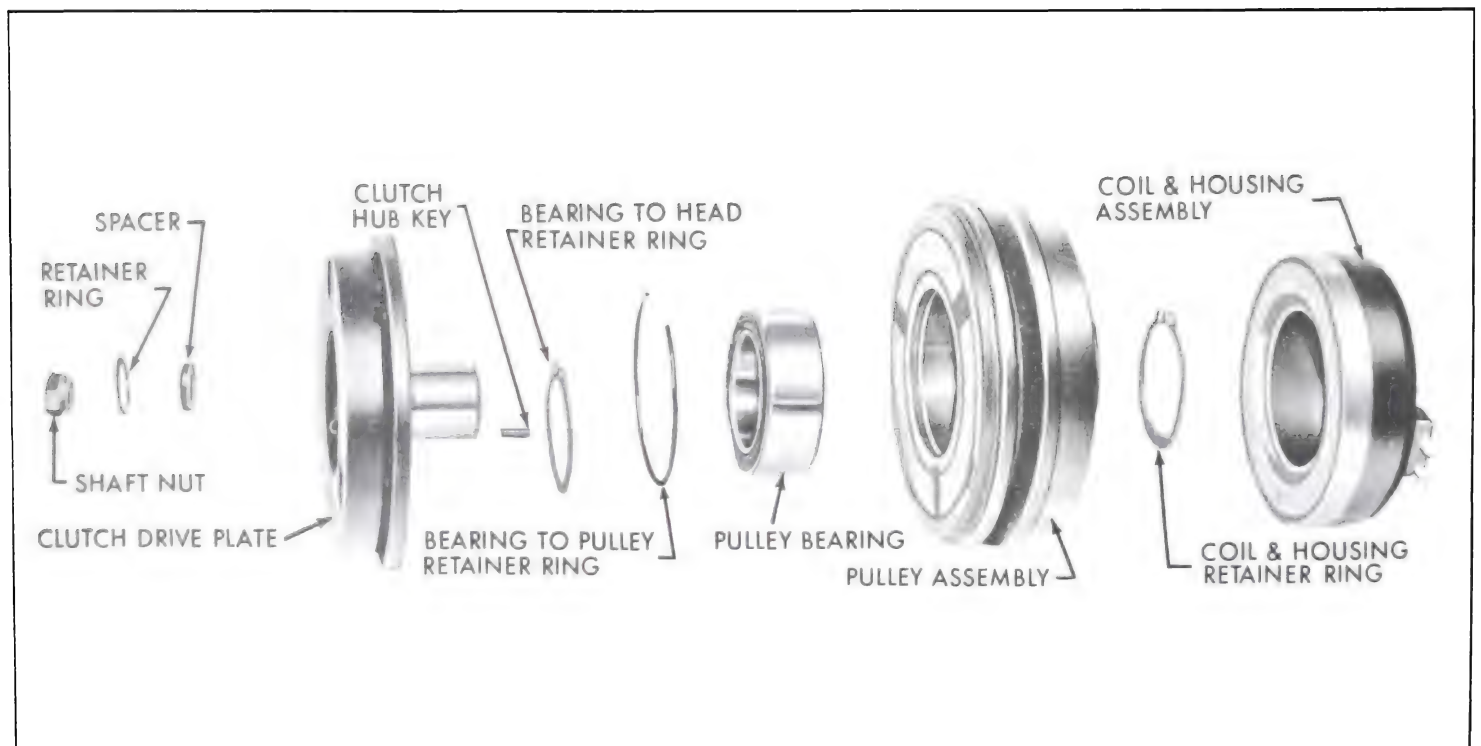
Compressor Magnetic Clutch Assembly - 4400 Series
